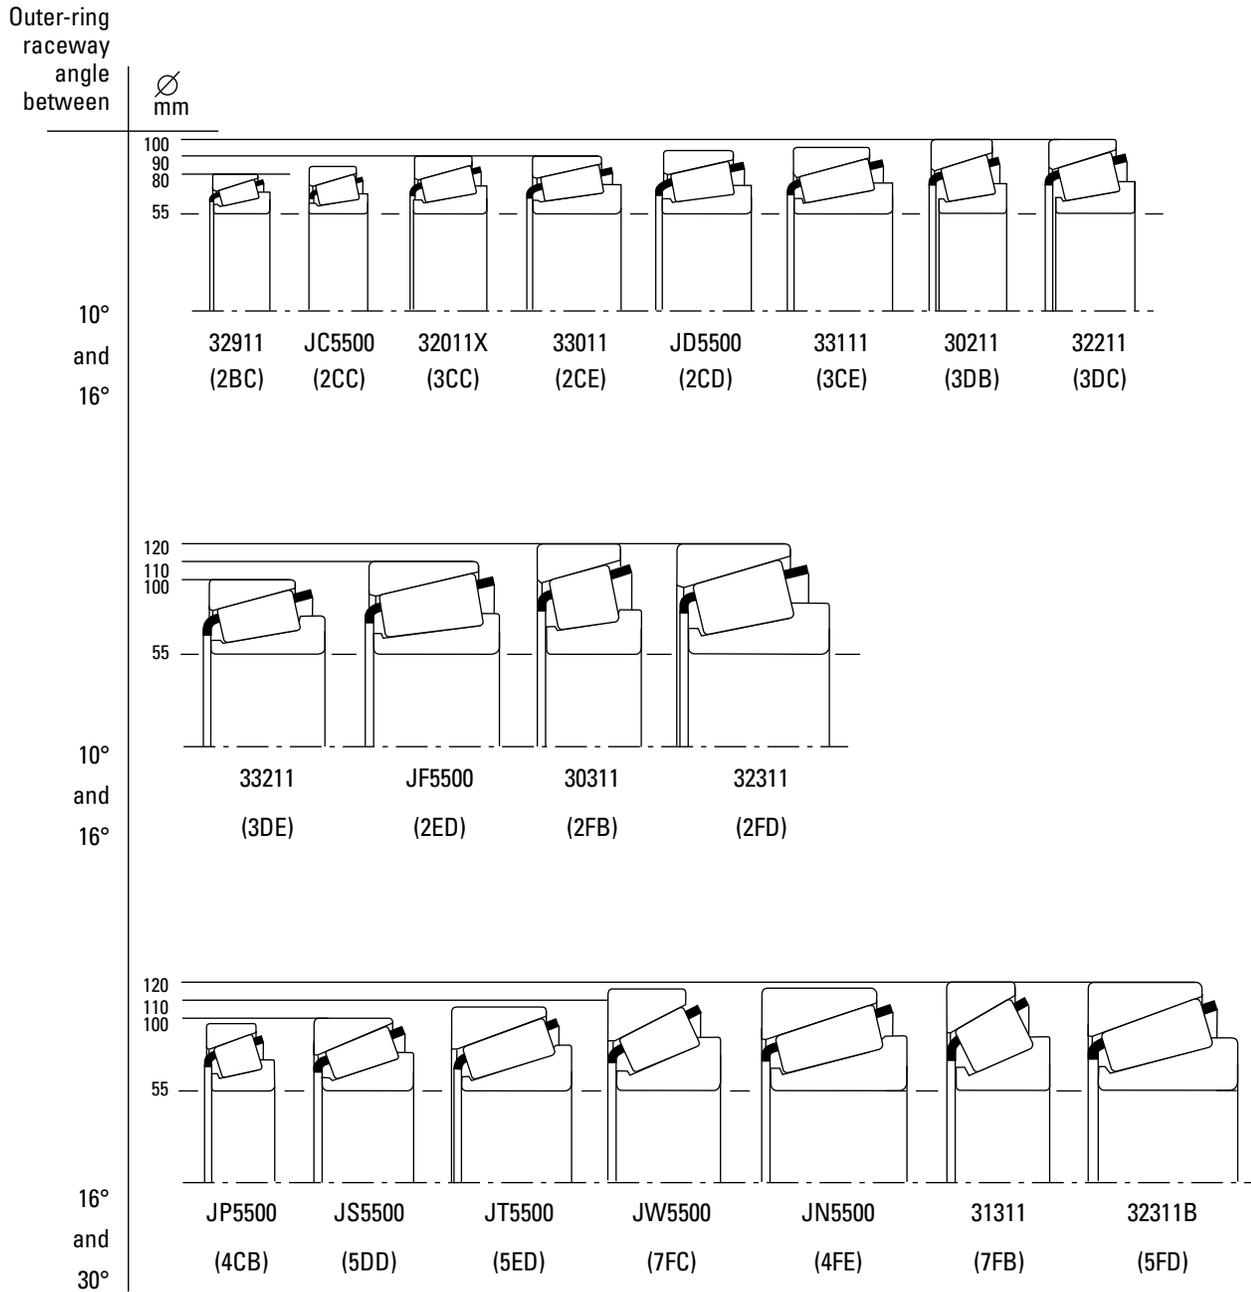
Comparison of metric bearing designs for 55 mm (2.1654 in.) bore.
